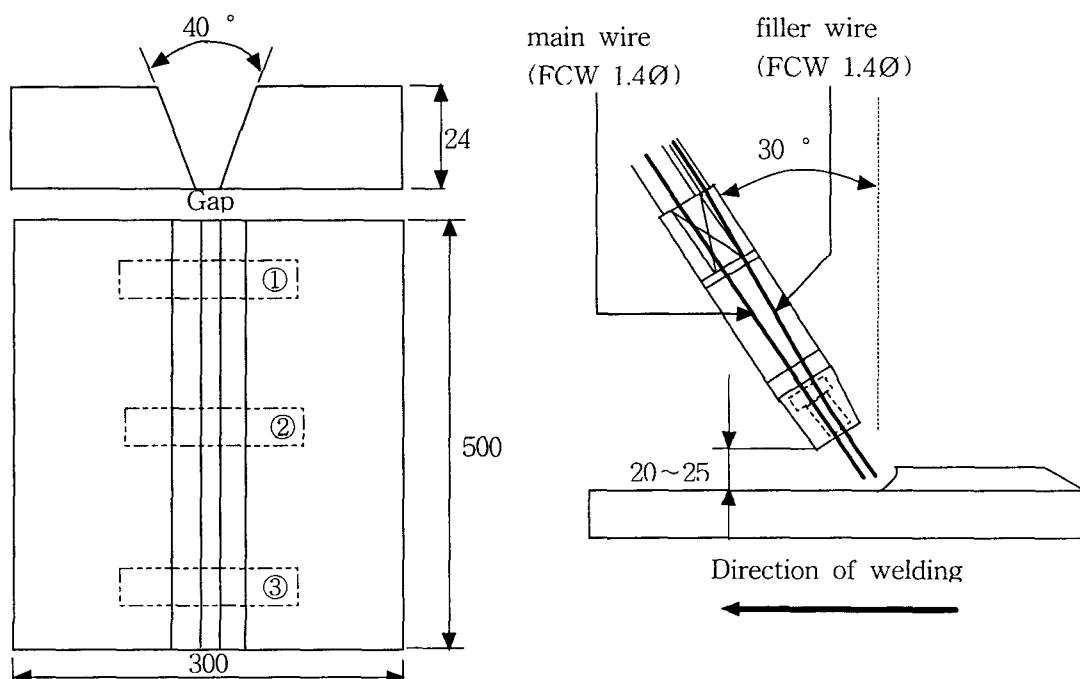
Fit-up condition of test assembly and arrangement of wire electrodes
